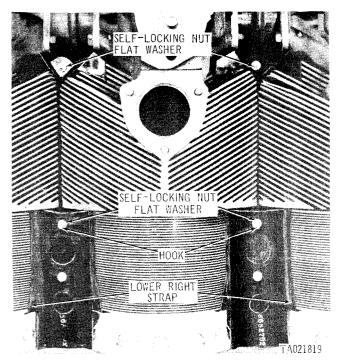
Removing or installing intercylinder head deflectors and disconnecting intcylinider deflector hooks – right side.
